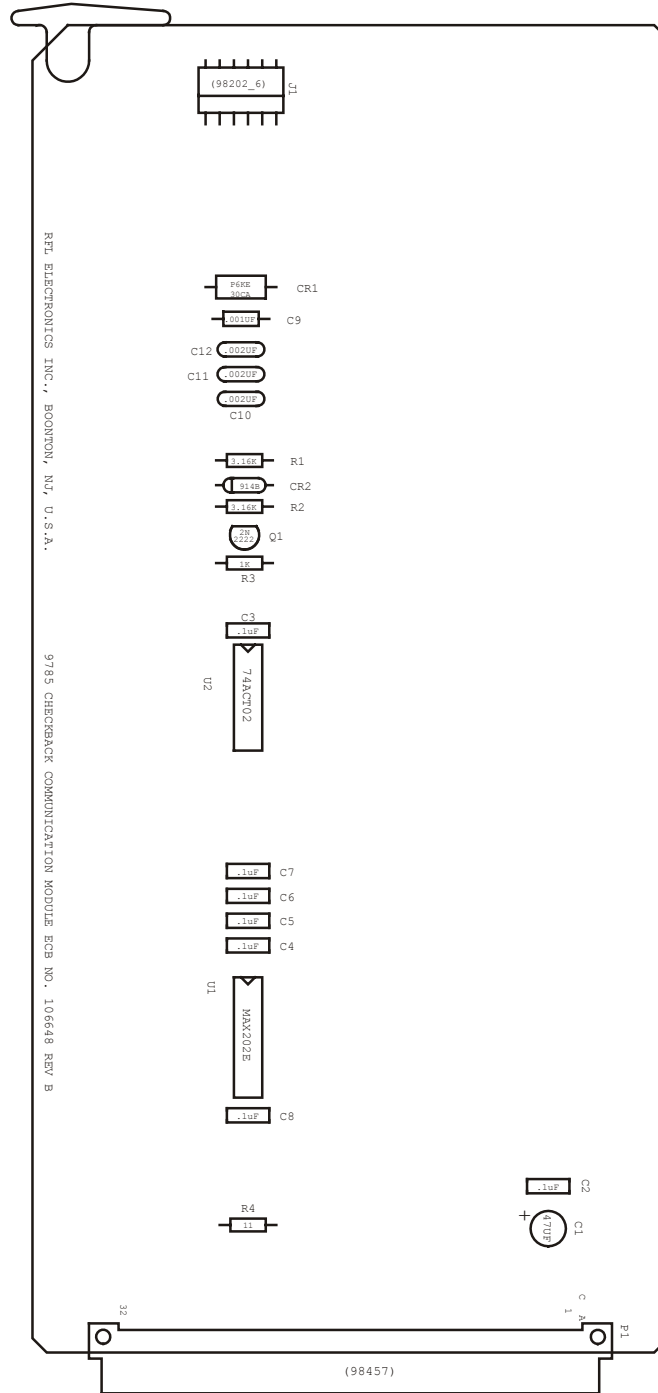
Component locator drawing, RFL 9785 Checkback Communications Module
